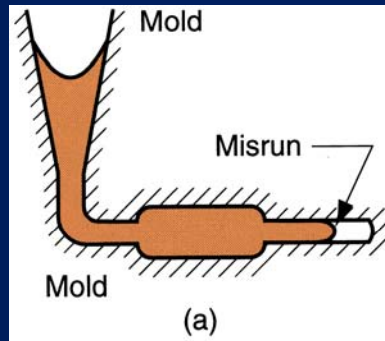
Some common defects in castings: (a) misrun
